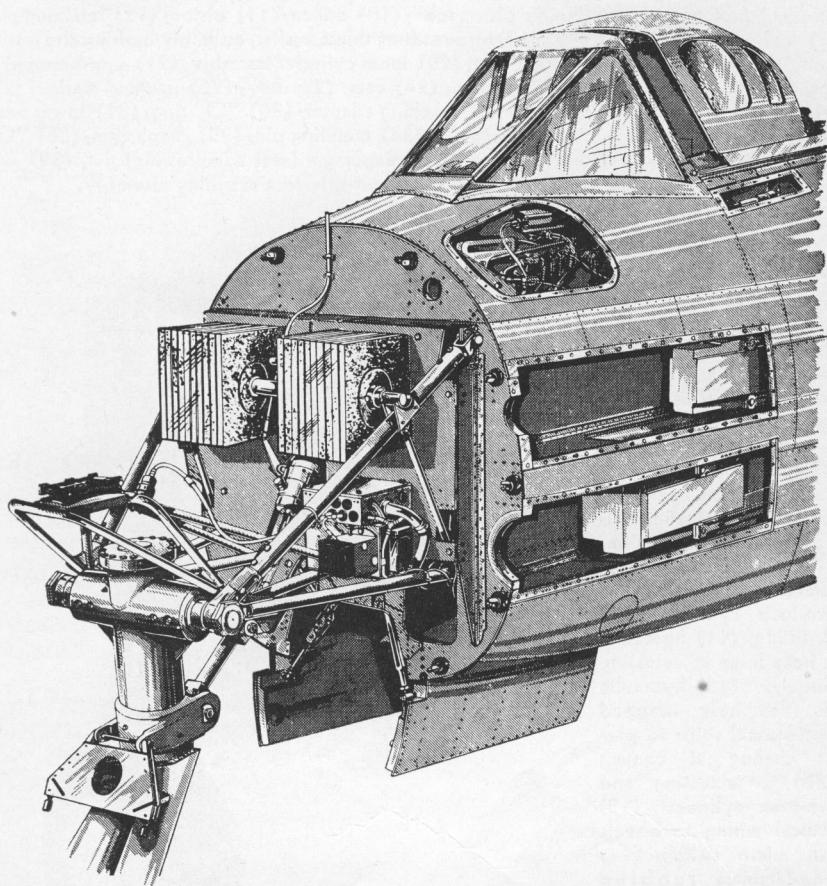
The installation of the nose landing wheel in a model specially modified for high-speed flight. The heavy blocks attached to the landing gear mount are to maintain proper c.g. following the removal of armament. Note the changes in cockpit canopy, in which small transparent sections are substituted for larger bubble-type canopy, which tended to warp because of the heat generated at greater than 600-mph speeds.
